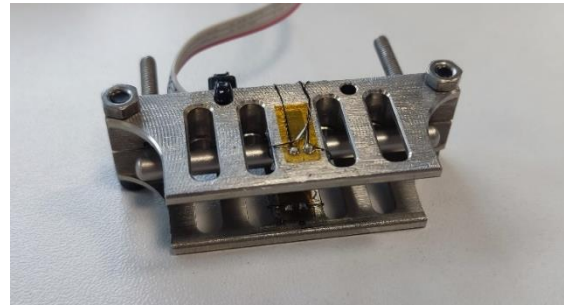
Complete instrumented CNC milled sensor with strain gauges and soldered connectors
